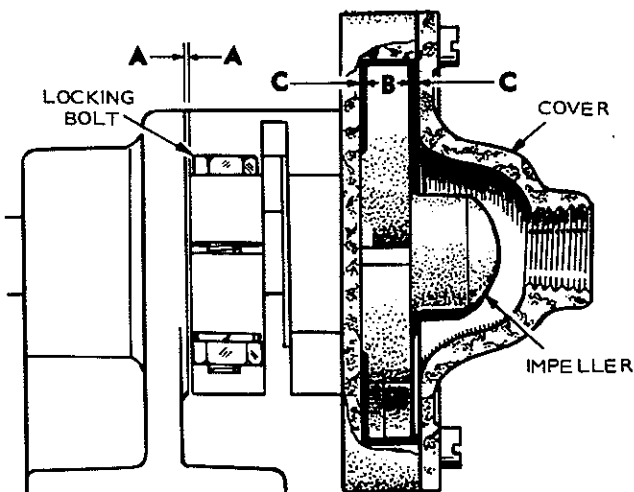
FRESH WATER PUMP (132-0074)
